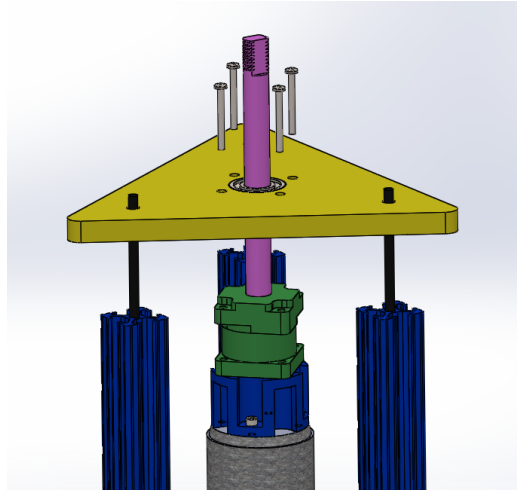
Bearing Press-Fit Into Bottom Bearing Retainer
